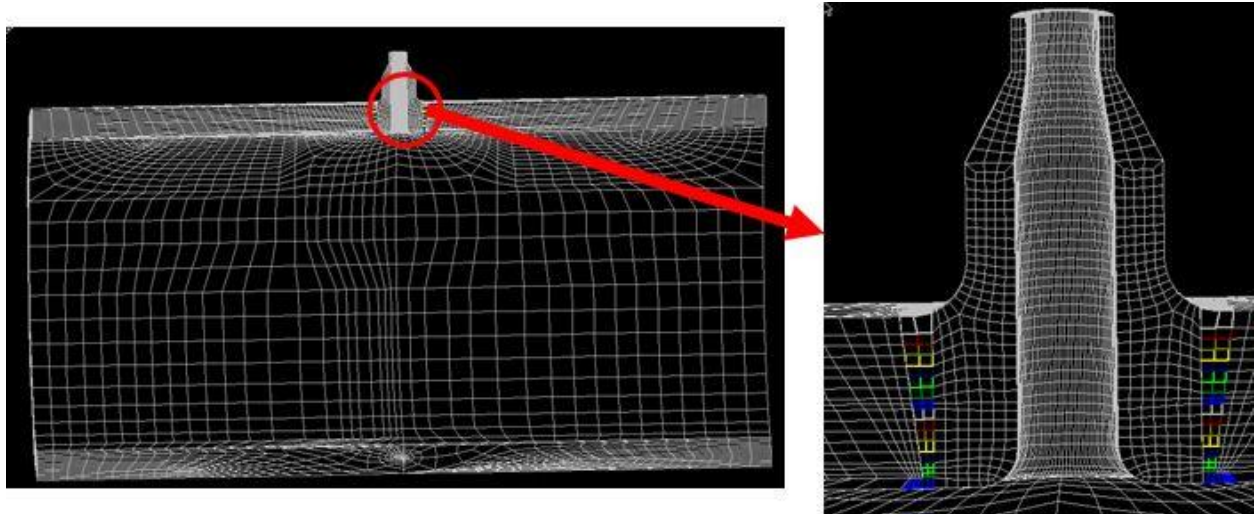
Head nozzle model (colors on right indicate weld passes)
